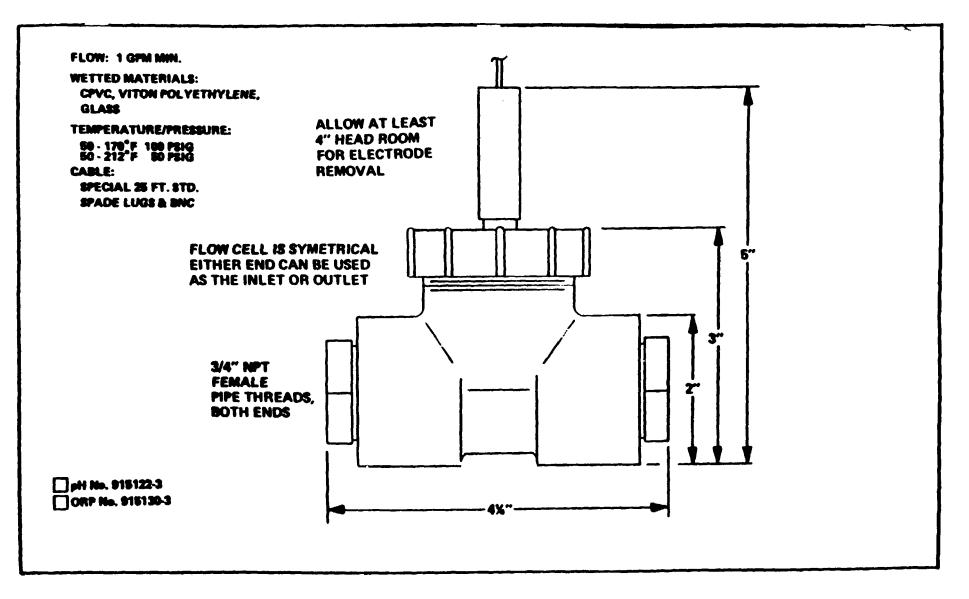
Optional pH Flow-Thru Sensor Dimensional Dwg.
